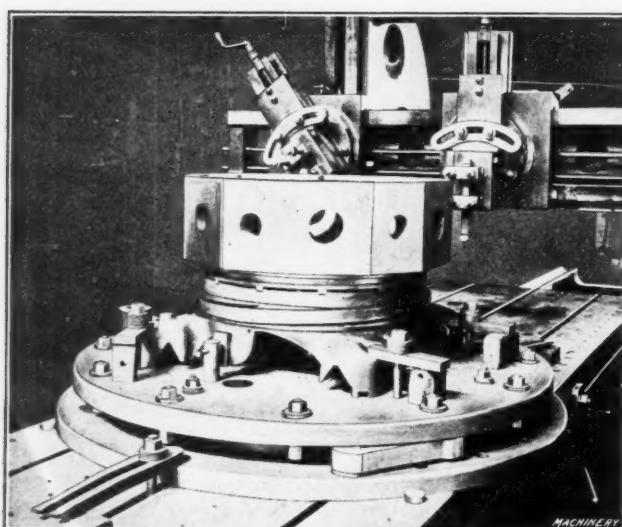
Testing Accuracy of Teeth and Spaces of Turret and Slide
